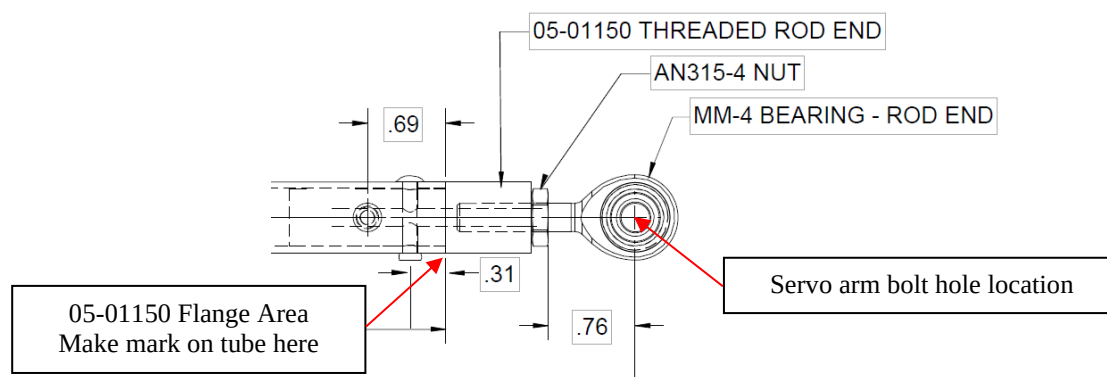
SERVO SIDE PUSH PULL TUBE FINAL ASSEMBLY
